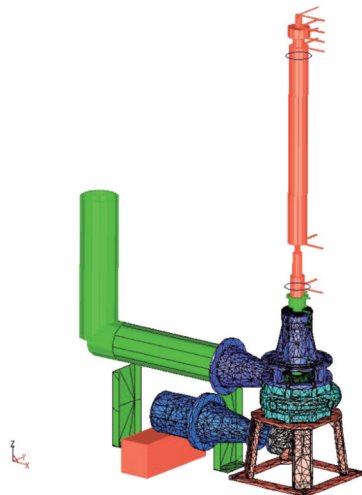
FEA Model for the Pump Assembly with the Suction and Discharge Piping, and the Drive Shaft.
